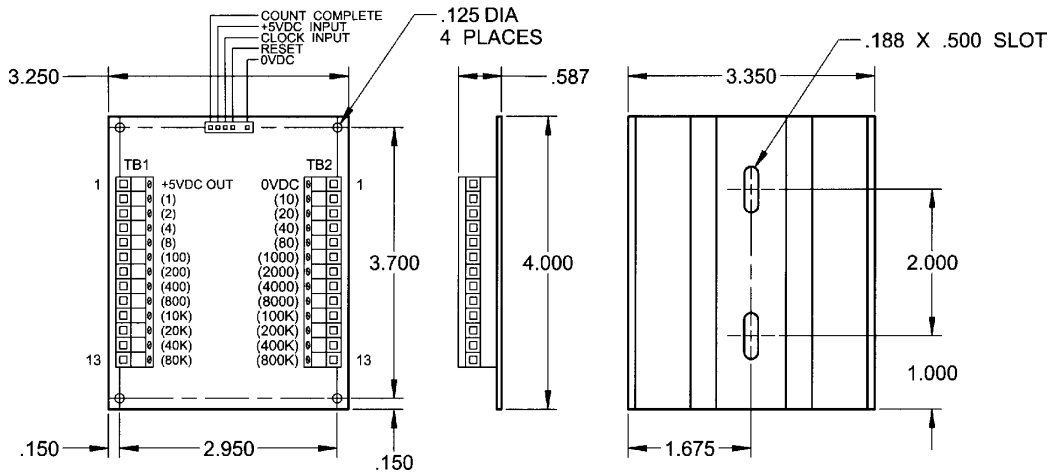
AA2210 BCD Counter Module Dimensions Drawing
